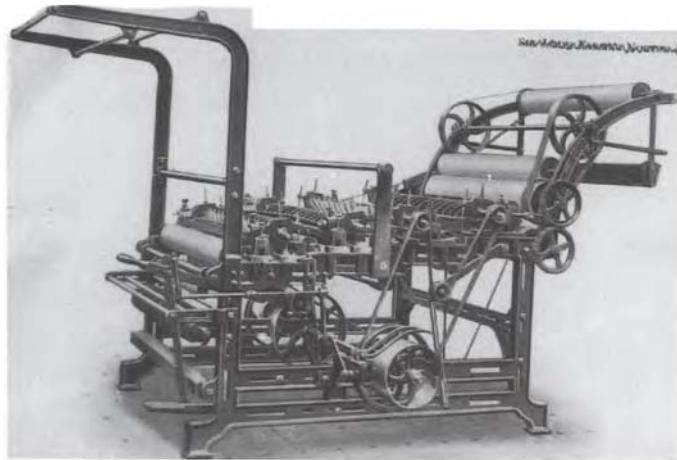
4-cutter shearing machine (Courtesy of Farmer Norton & Co. Ltd.).
